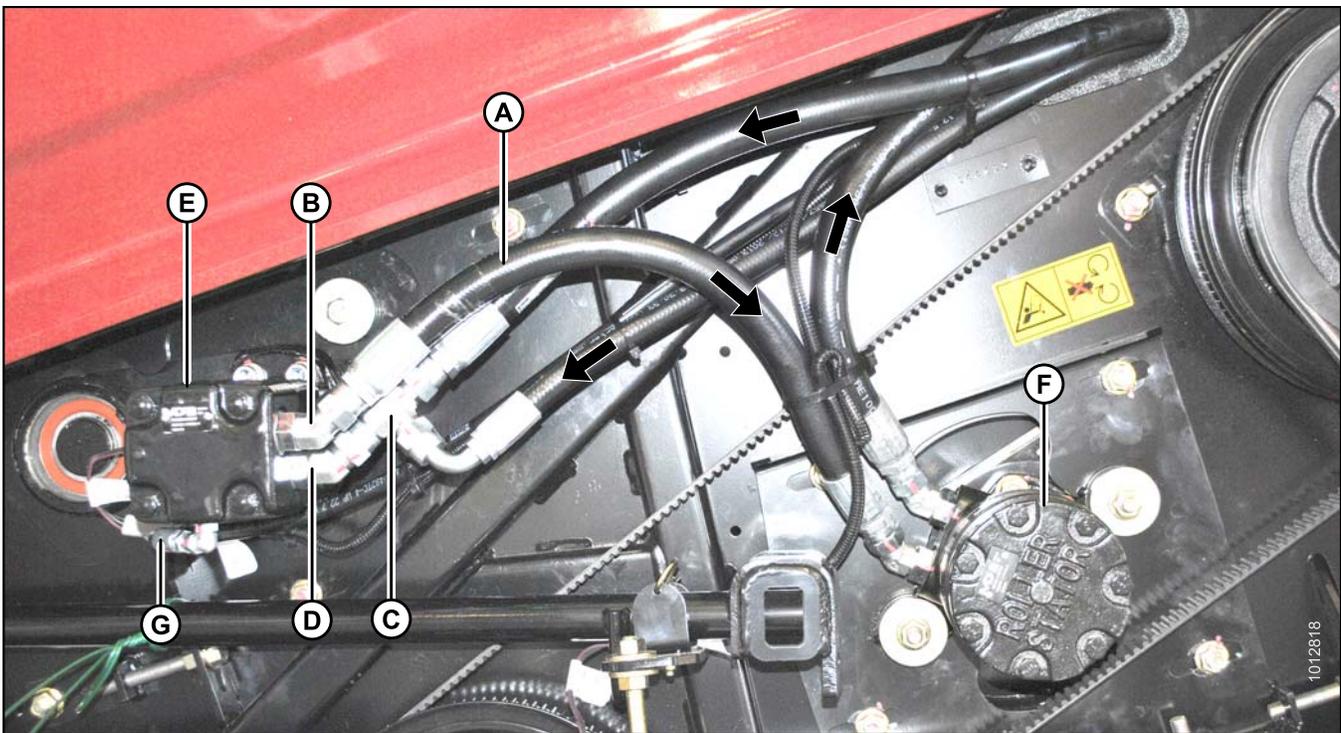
New Reel Motor, Auger Motor, Hoses, and Fittings (M100, M105, M205 Configuration)
